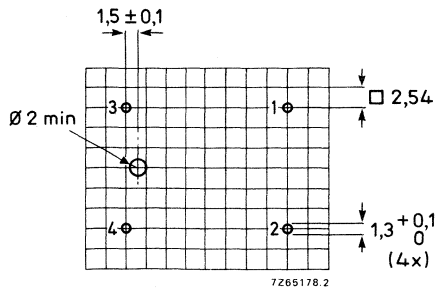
Hole pattern for mounting on a printed-wiring board (component side).
